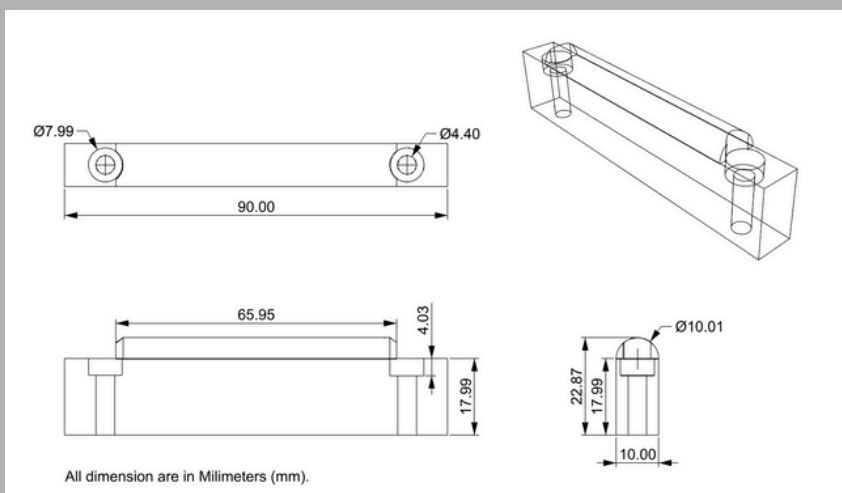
, Rhino 8 2D layout schematic of force applying rod used in 3 points bend test.
